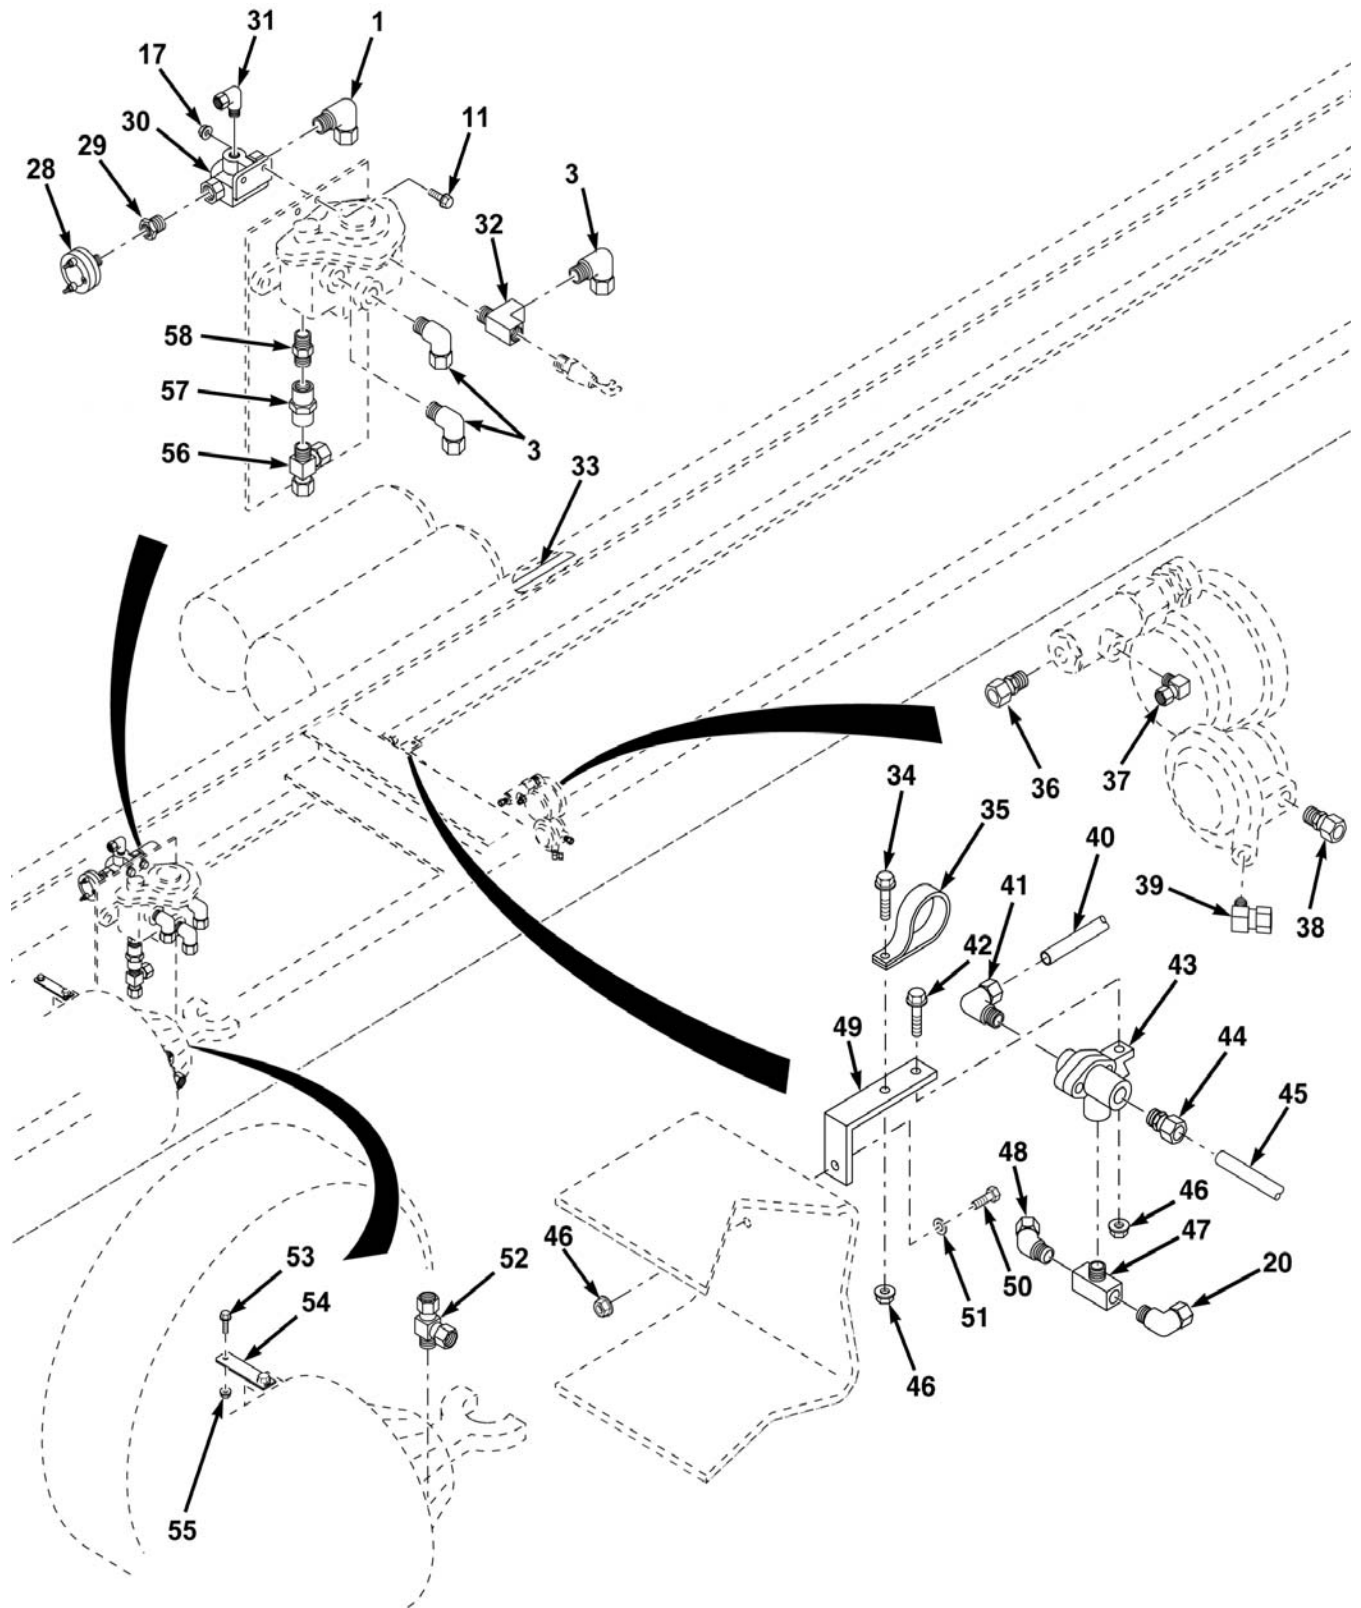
CHASSIS AIR (SHEET 2 OF 15)
